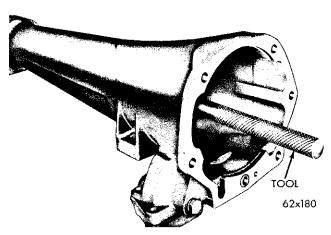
Removing Outer Shaft Bearing (Imperial Models)
